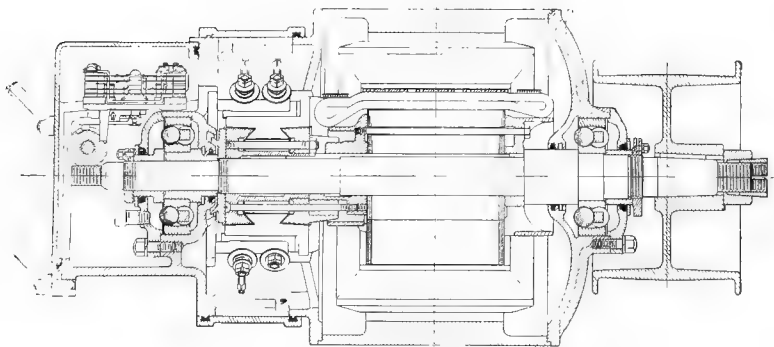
Section Through Type D-5 Ball Bearing Dynamo.
